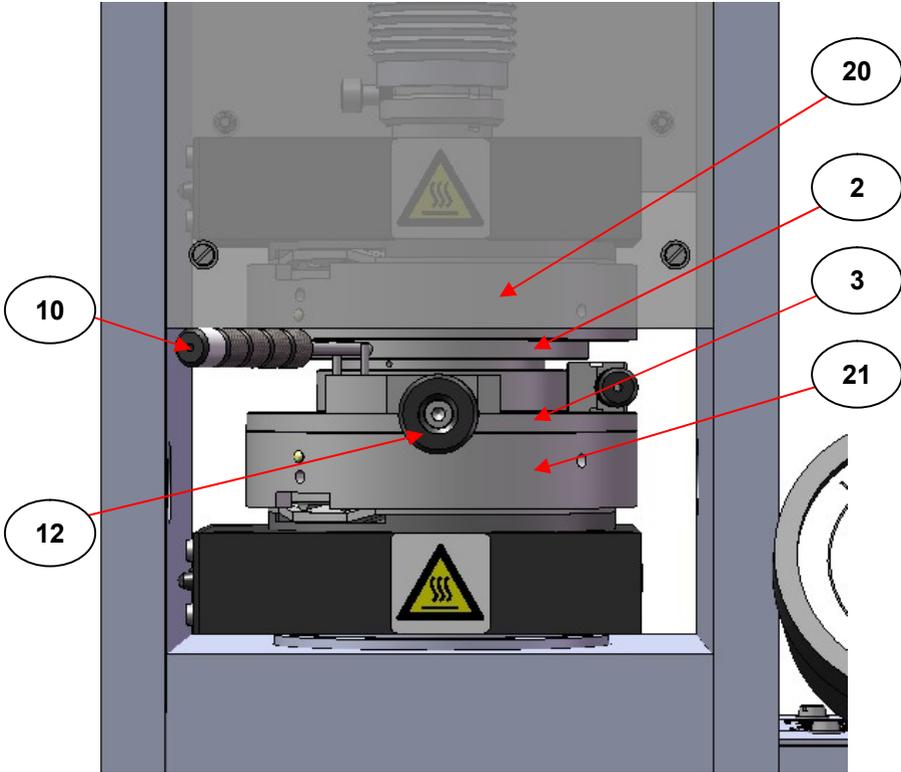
Film Maker Accessory Assembly of Parts in an Atlas™ Manual Hydraulic Press Fitted With Atlas™ Heated Platens
